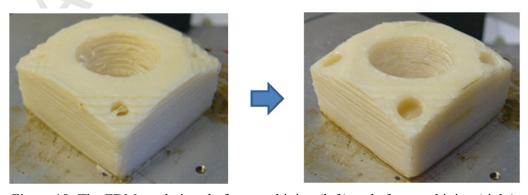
The FDM workpiece before machining (left) and after machining (right)
